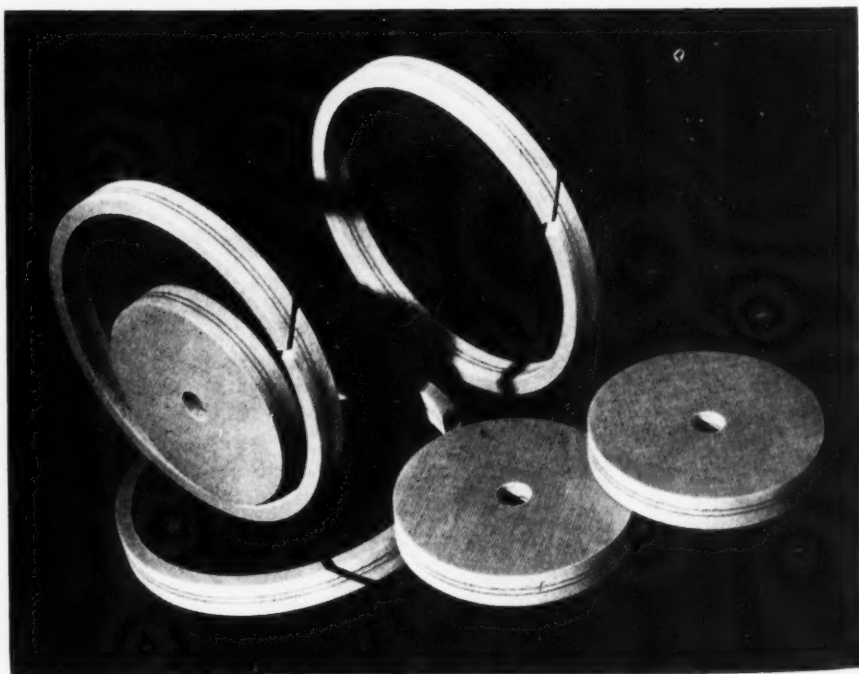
Piston-rings and Valve Disks Machined from Laminated Phenolic Plate
